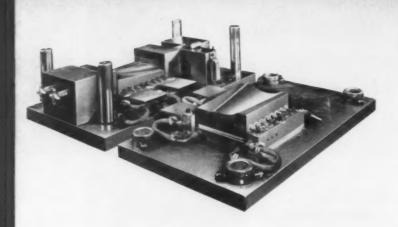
Explosion restrike die for final forming (from inside) of folded and welded inlet guide vanes. The shotgun shell employed can be seen on firing chamber at top center.
